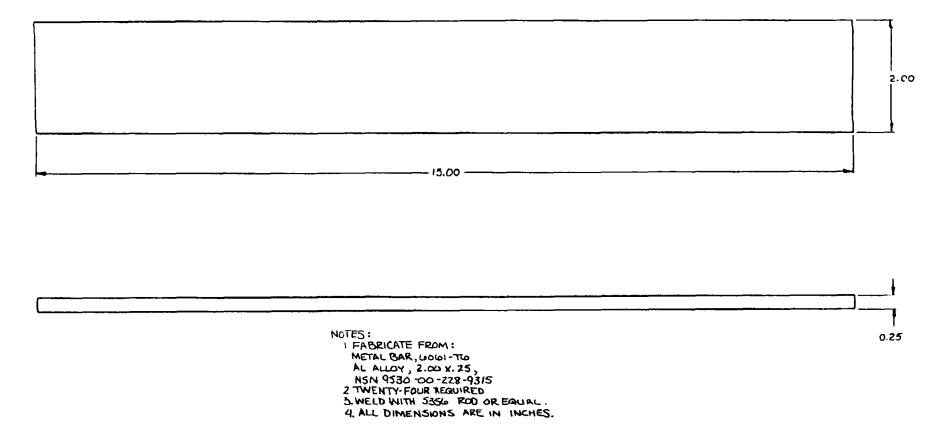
Tool Box Rack (15 Unit) Part No. 200832673 (Sheet 9 of 10)
